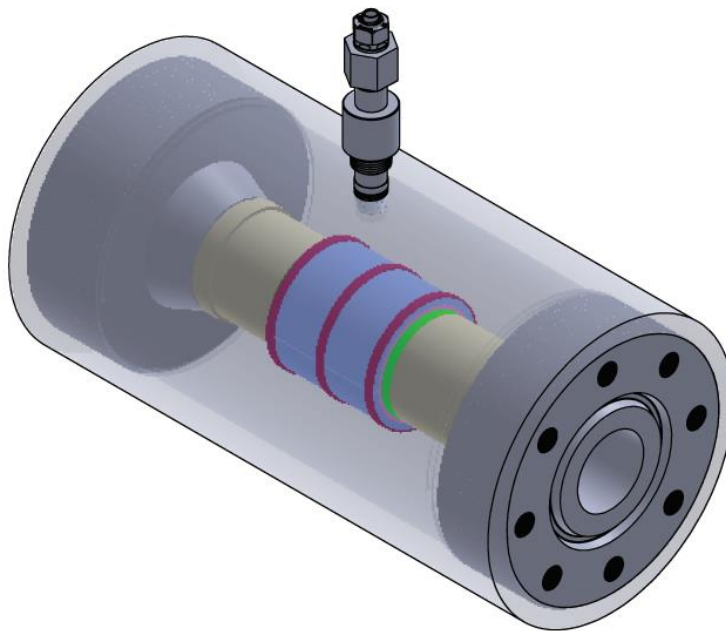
Sensor spool with subsea pressure shell, PCB sensor, and cable port
